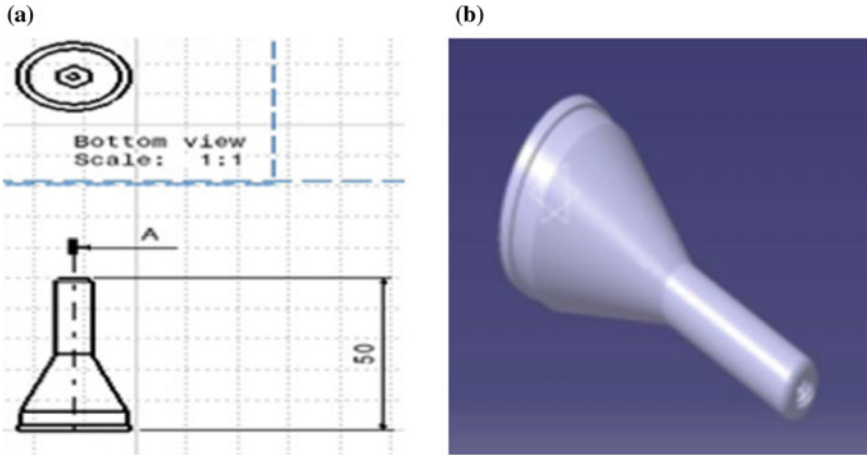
a 2D drawing of a modified nozzle b CAD model of a modified nozzle
